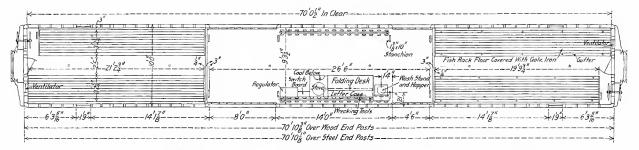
Fioor Plan of Missouri Pacific Baggage Car. Builder, American Car & Foundry Company.
